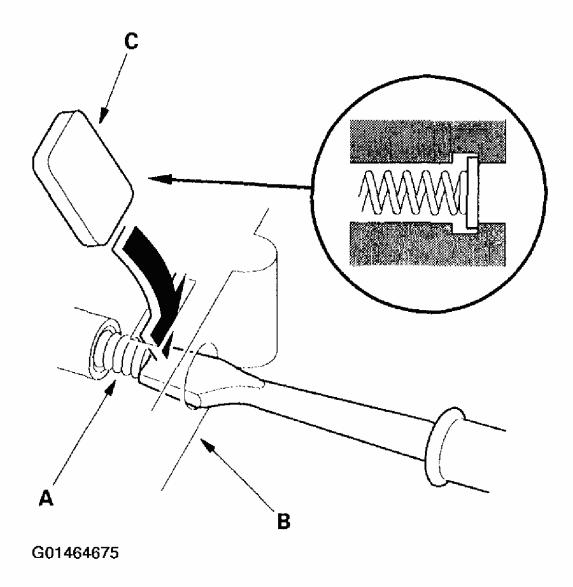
Inserting The Spring In The Valve, & Installing The Valve In The Valve Body & Installing The Spring Seat Courtesy of AMERICAN HONDA MOTOR CO., INC.
